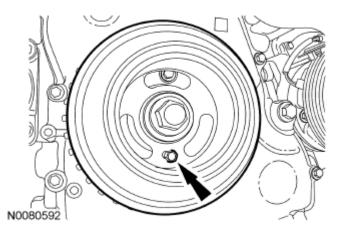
View Of Crankshaft Pulley And 6mm x 18 mm Bolt Courtesy of FORD MOTOR CO.
